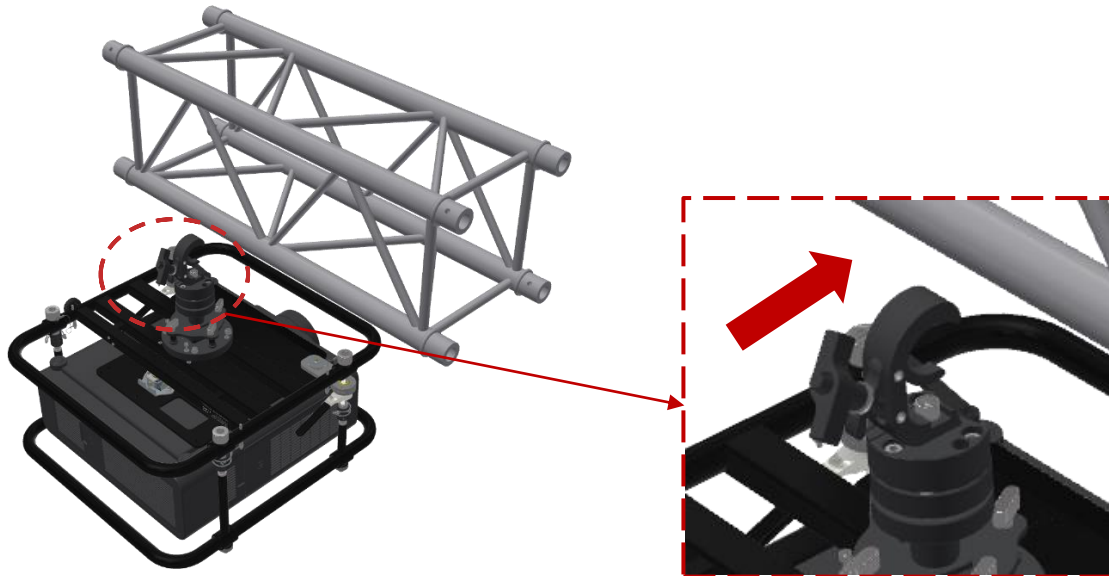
Mounting EVO-LINK-200 or -201 to a truss
